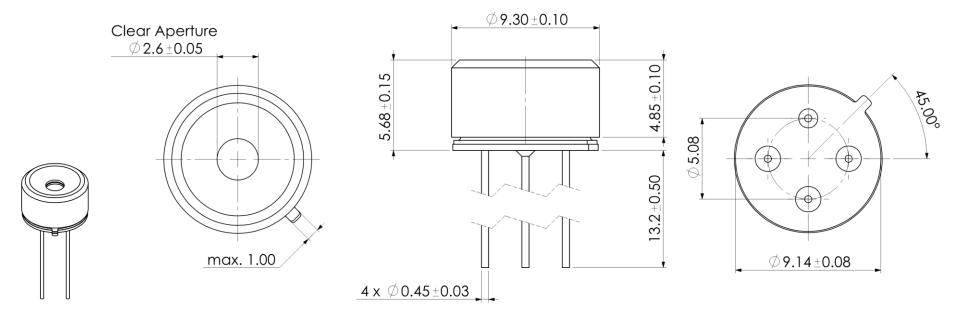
dimensional drawing of the HTPA16x4R1L2.1EA
